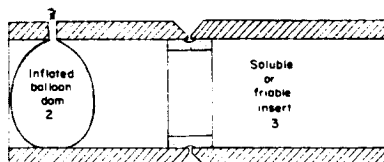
A STANDARD METHOD OF APPLYING ARGON TO THE BACK OF A WELD (REF. 45)
